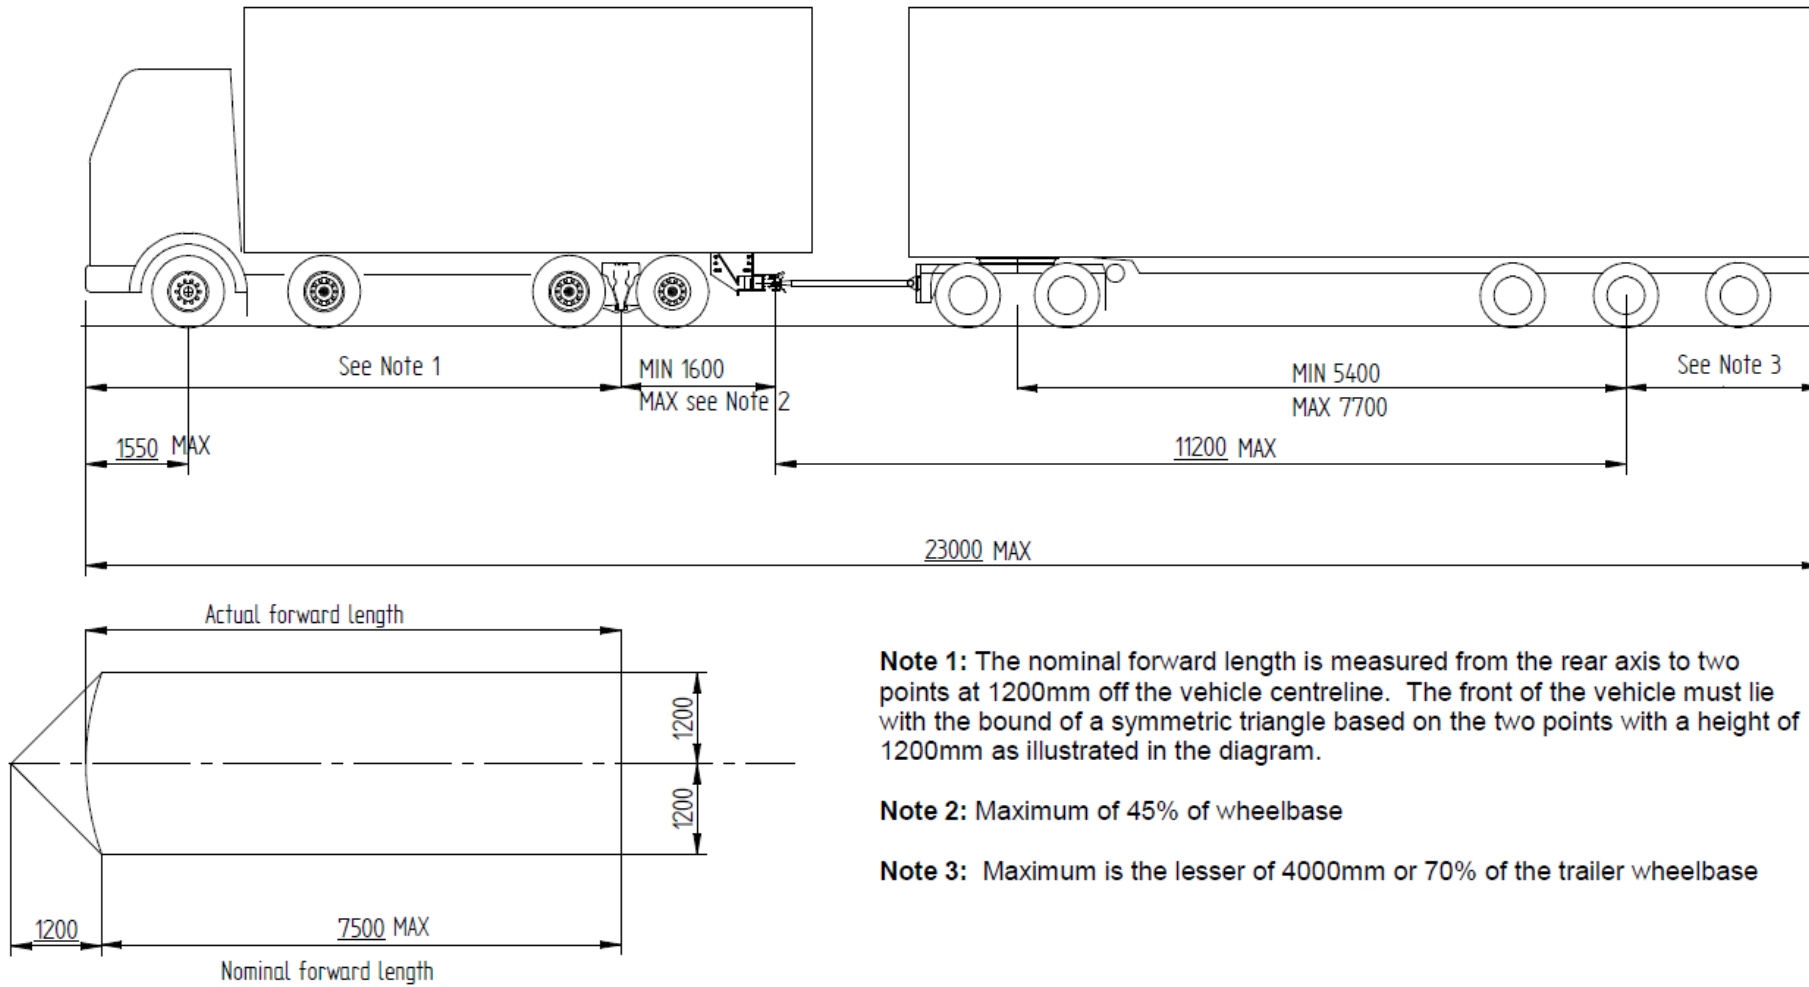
Proposed new 23m truck and long trailer pro-forma design with 1600mm minimum hitch offset.
